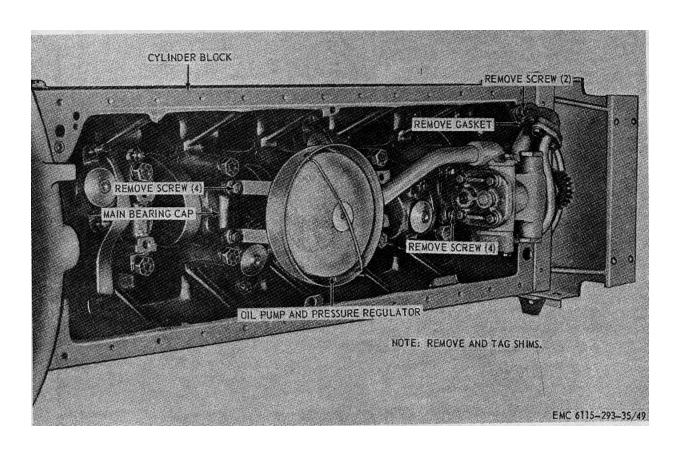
Engine oil pump and pressure regulator, removal and installation.
